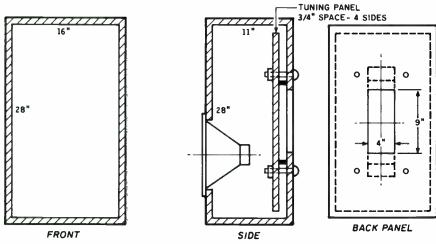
Test box drawing inside dimensions 16" x 28" x 11", 36 in.2 port.
